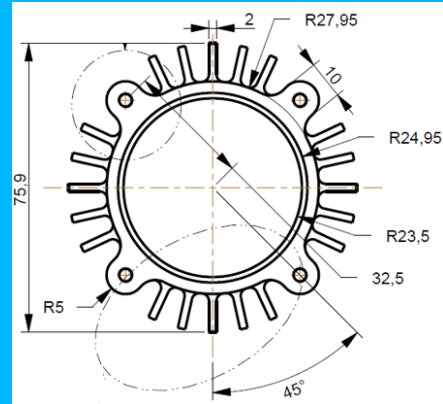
Engineering drawing of the PMSM aluminum housing (all dimensions are in mm).
